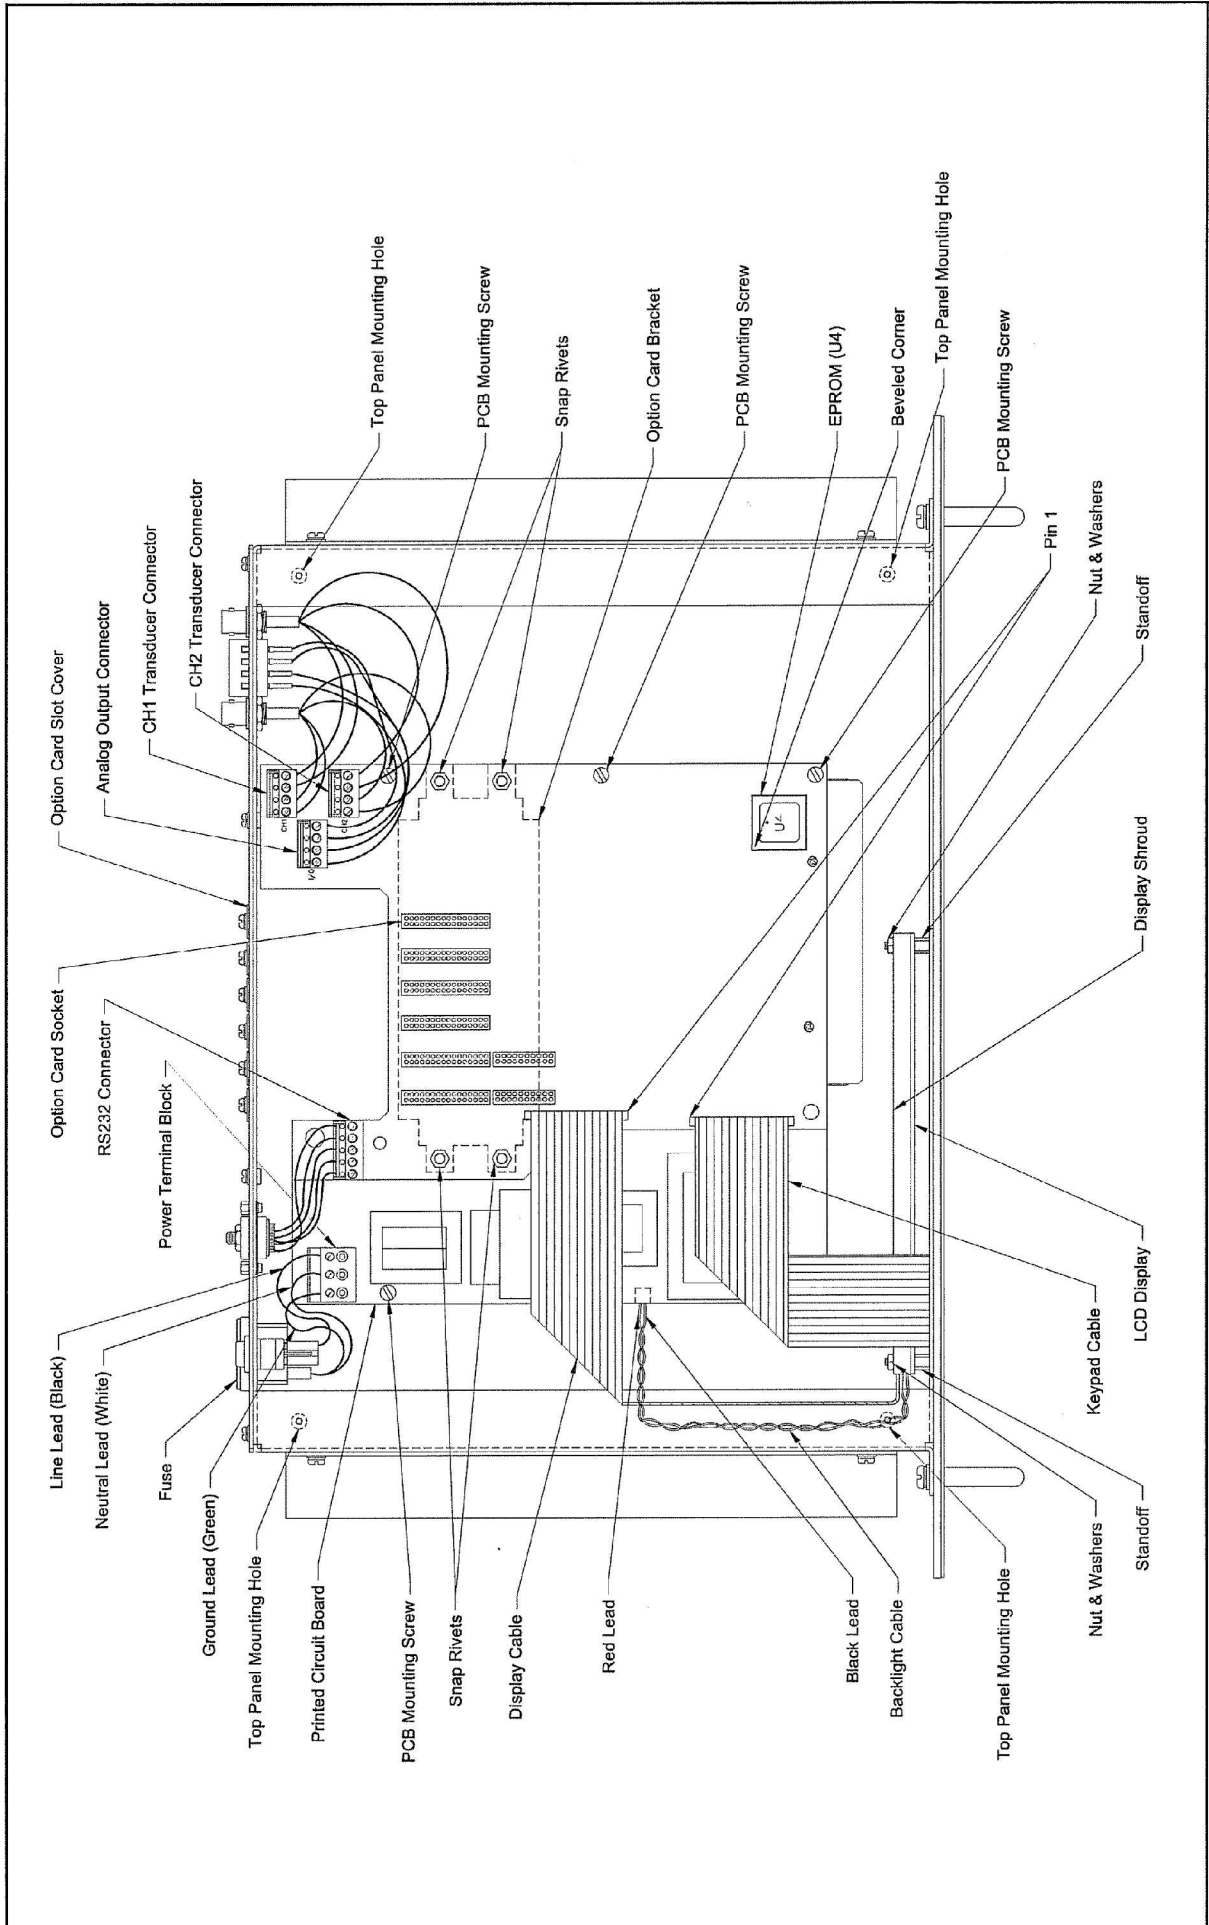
Model GS868 Rack Mount Console Assembly - Drawing #705-849
